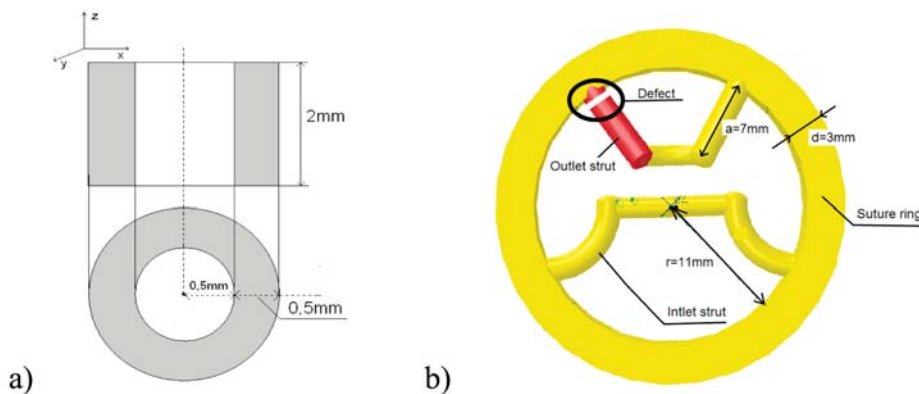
a) Dimension of the coil, b) Dimension of the BSCC heart valve
